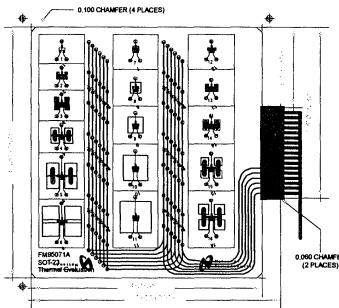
Top Side of the 4.5”x5” SuperSOT™-3 Thermal Board. Complete scale drawings is shown in section 5.
